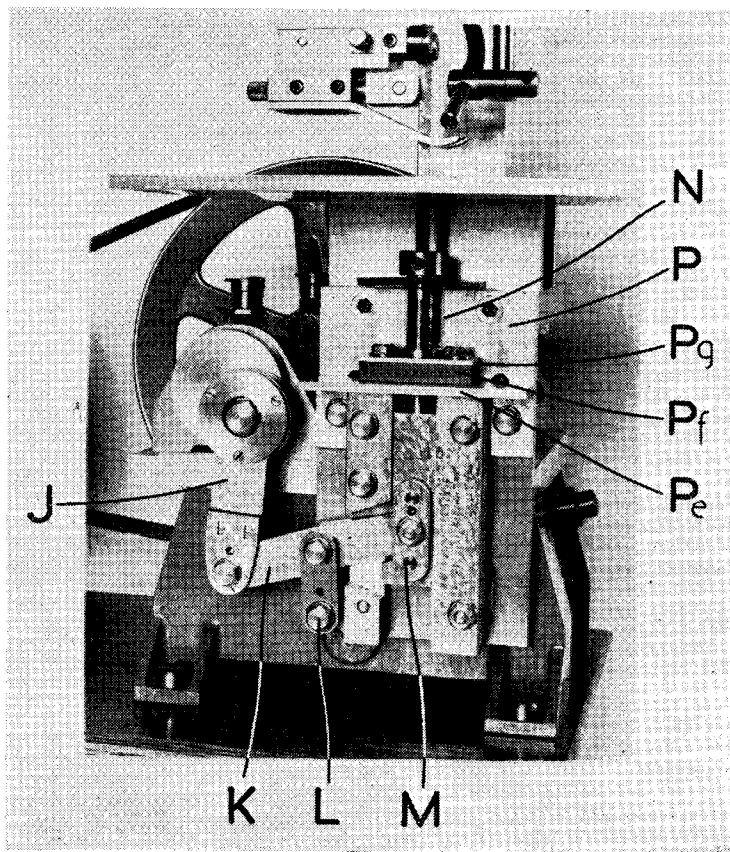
J*—the connecting-rod; *K*—the beam; *L*—the beam bracket; *M*—the crosshead; *N*—the drive-rod; *P*—the motion-plate; *Pe*—the driving-rod bearing bracket; *Pf*—the bearing block; *Pg*—the bearing cover plate
